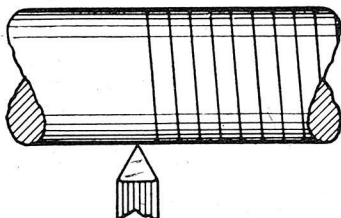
Trial Cut to Check the Set-up for Thread Cutting
